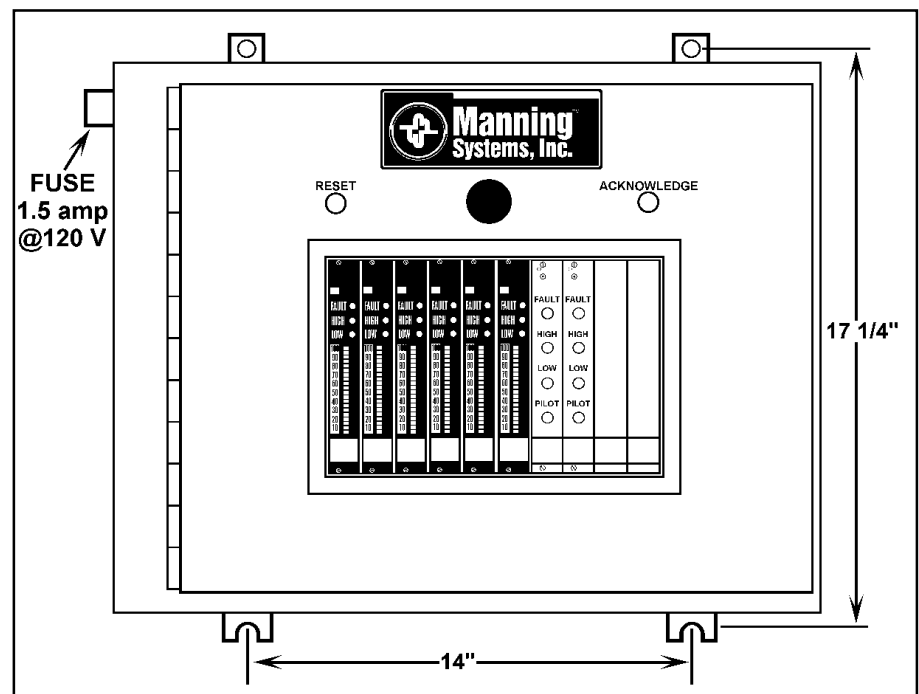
Mounting dimensions for the Model 20 Gas Monitoring Alarm System
